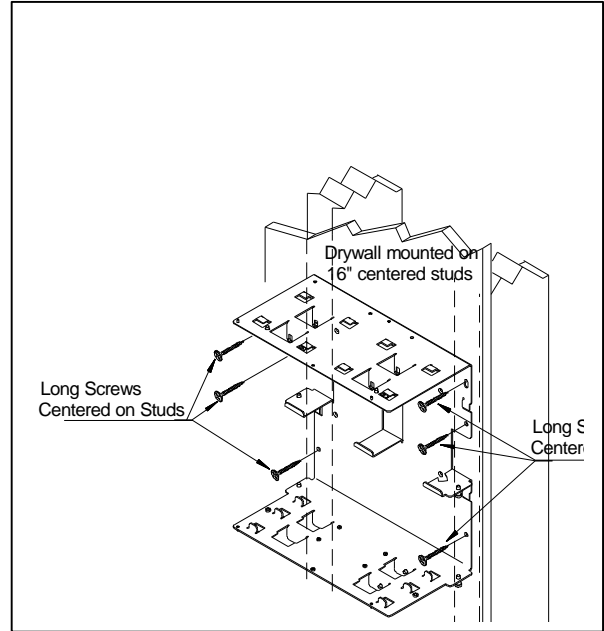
Mounting on Drywall Backed with 16" Center Studs
